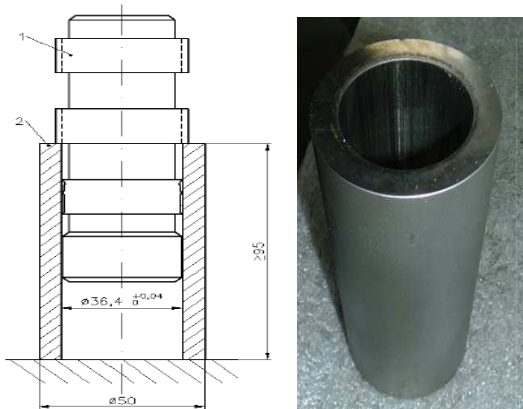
Experimental setup of the shear test: 1 – specimen, 2 – tubular support (heat treated)
